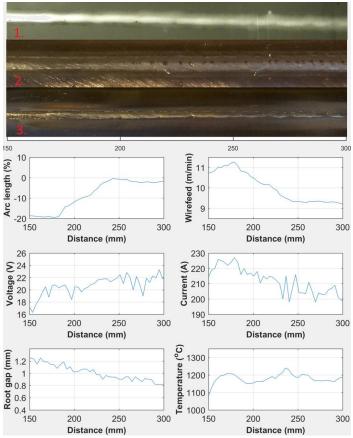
Full neural control test experiment A24, welding parameters plotted over the weld. Distance being the length of the welded seam starting from arc ignition. On the top is the X-ray image of the weld (1.), in the middle top side of the weld (2.) and in the bottom, is the back side of the weld (3.). Weld profile is cut to fit the scale in the measurements.
